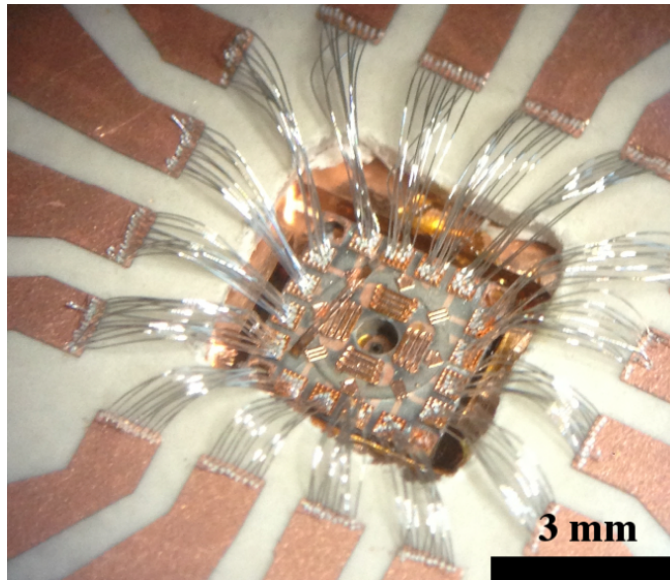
Image of a quadrupole electromagnet packaged in a copper beam testing fixture with a laser-machined 50- μm electron-beam aperture.
